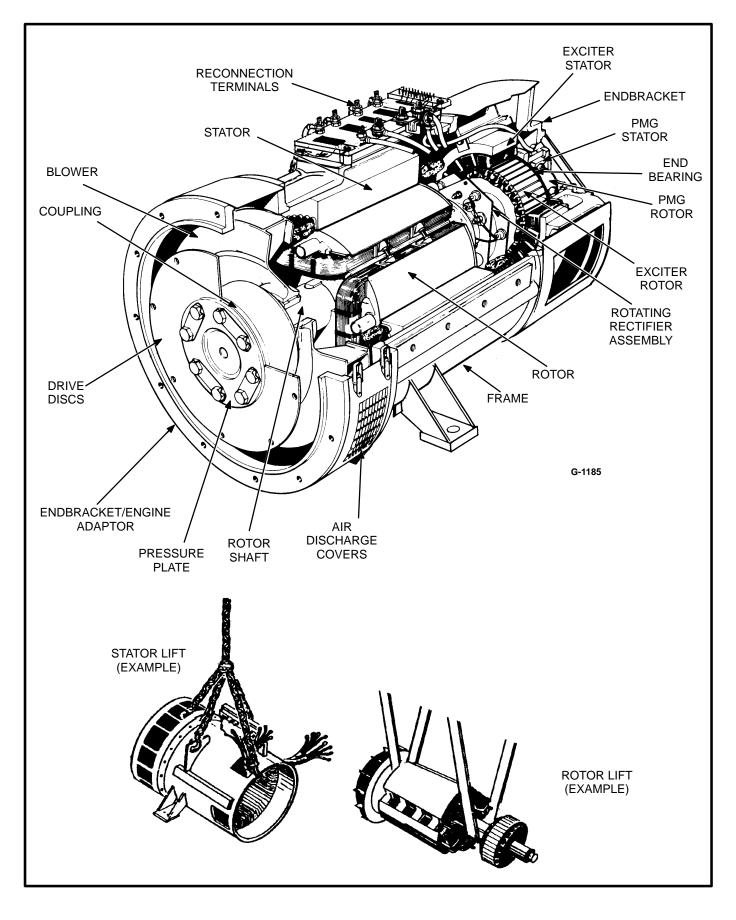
TYPICAL GENERATOR ASSEMBLY
